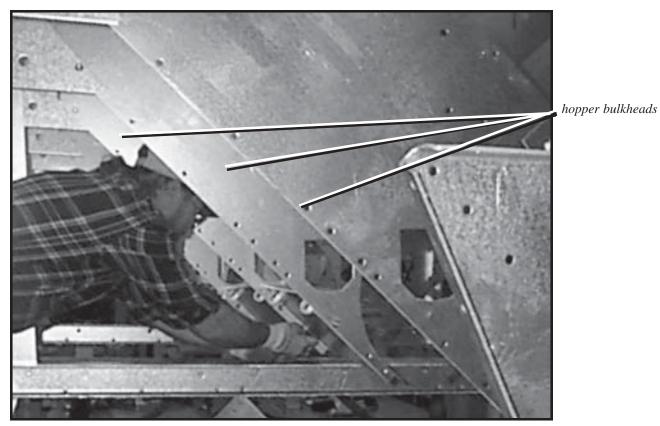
Loosely bolting trough panel weldments through dryer.
